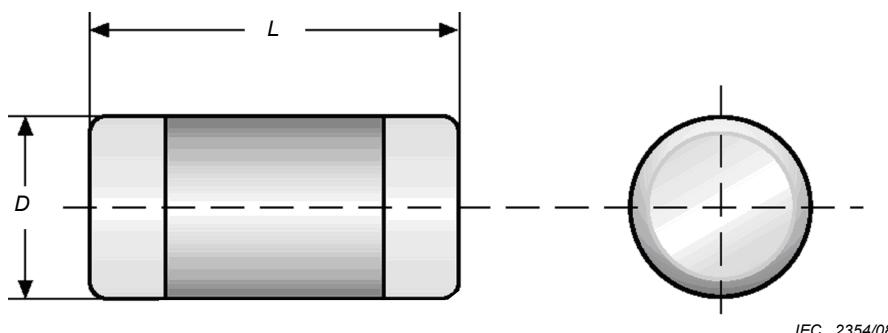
Shape and dimensions of cylindrical (RC) resistors
